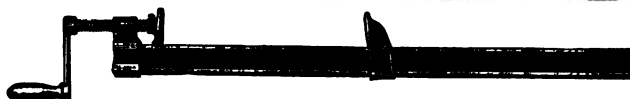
MANUFACTURERS' AND BUILDERS' STEEL BAR CLAMP.
